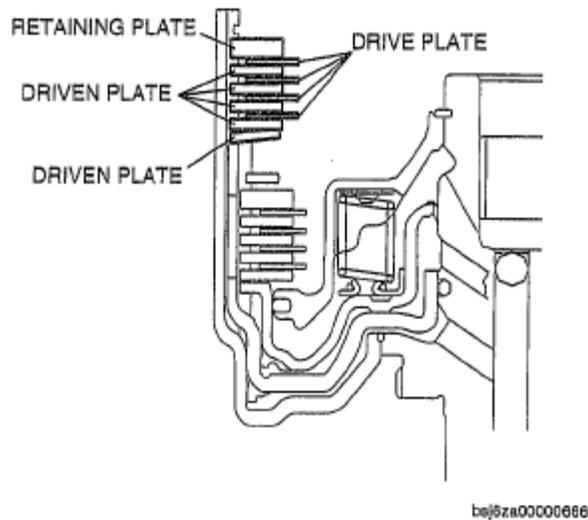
Identifying Retaining Plate, Drive And Driven Plate
